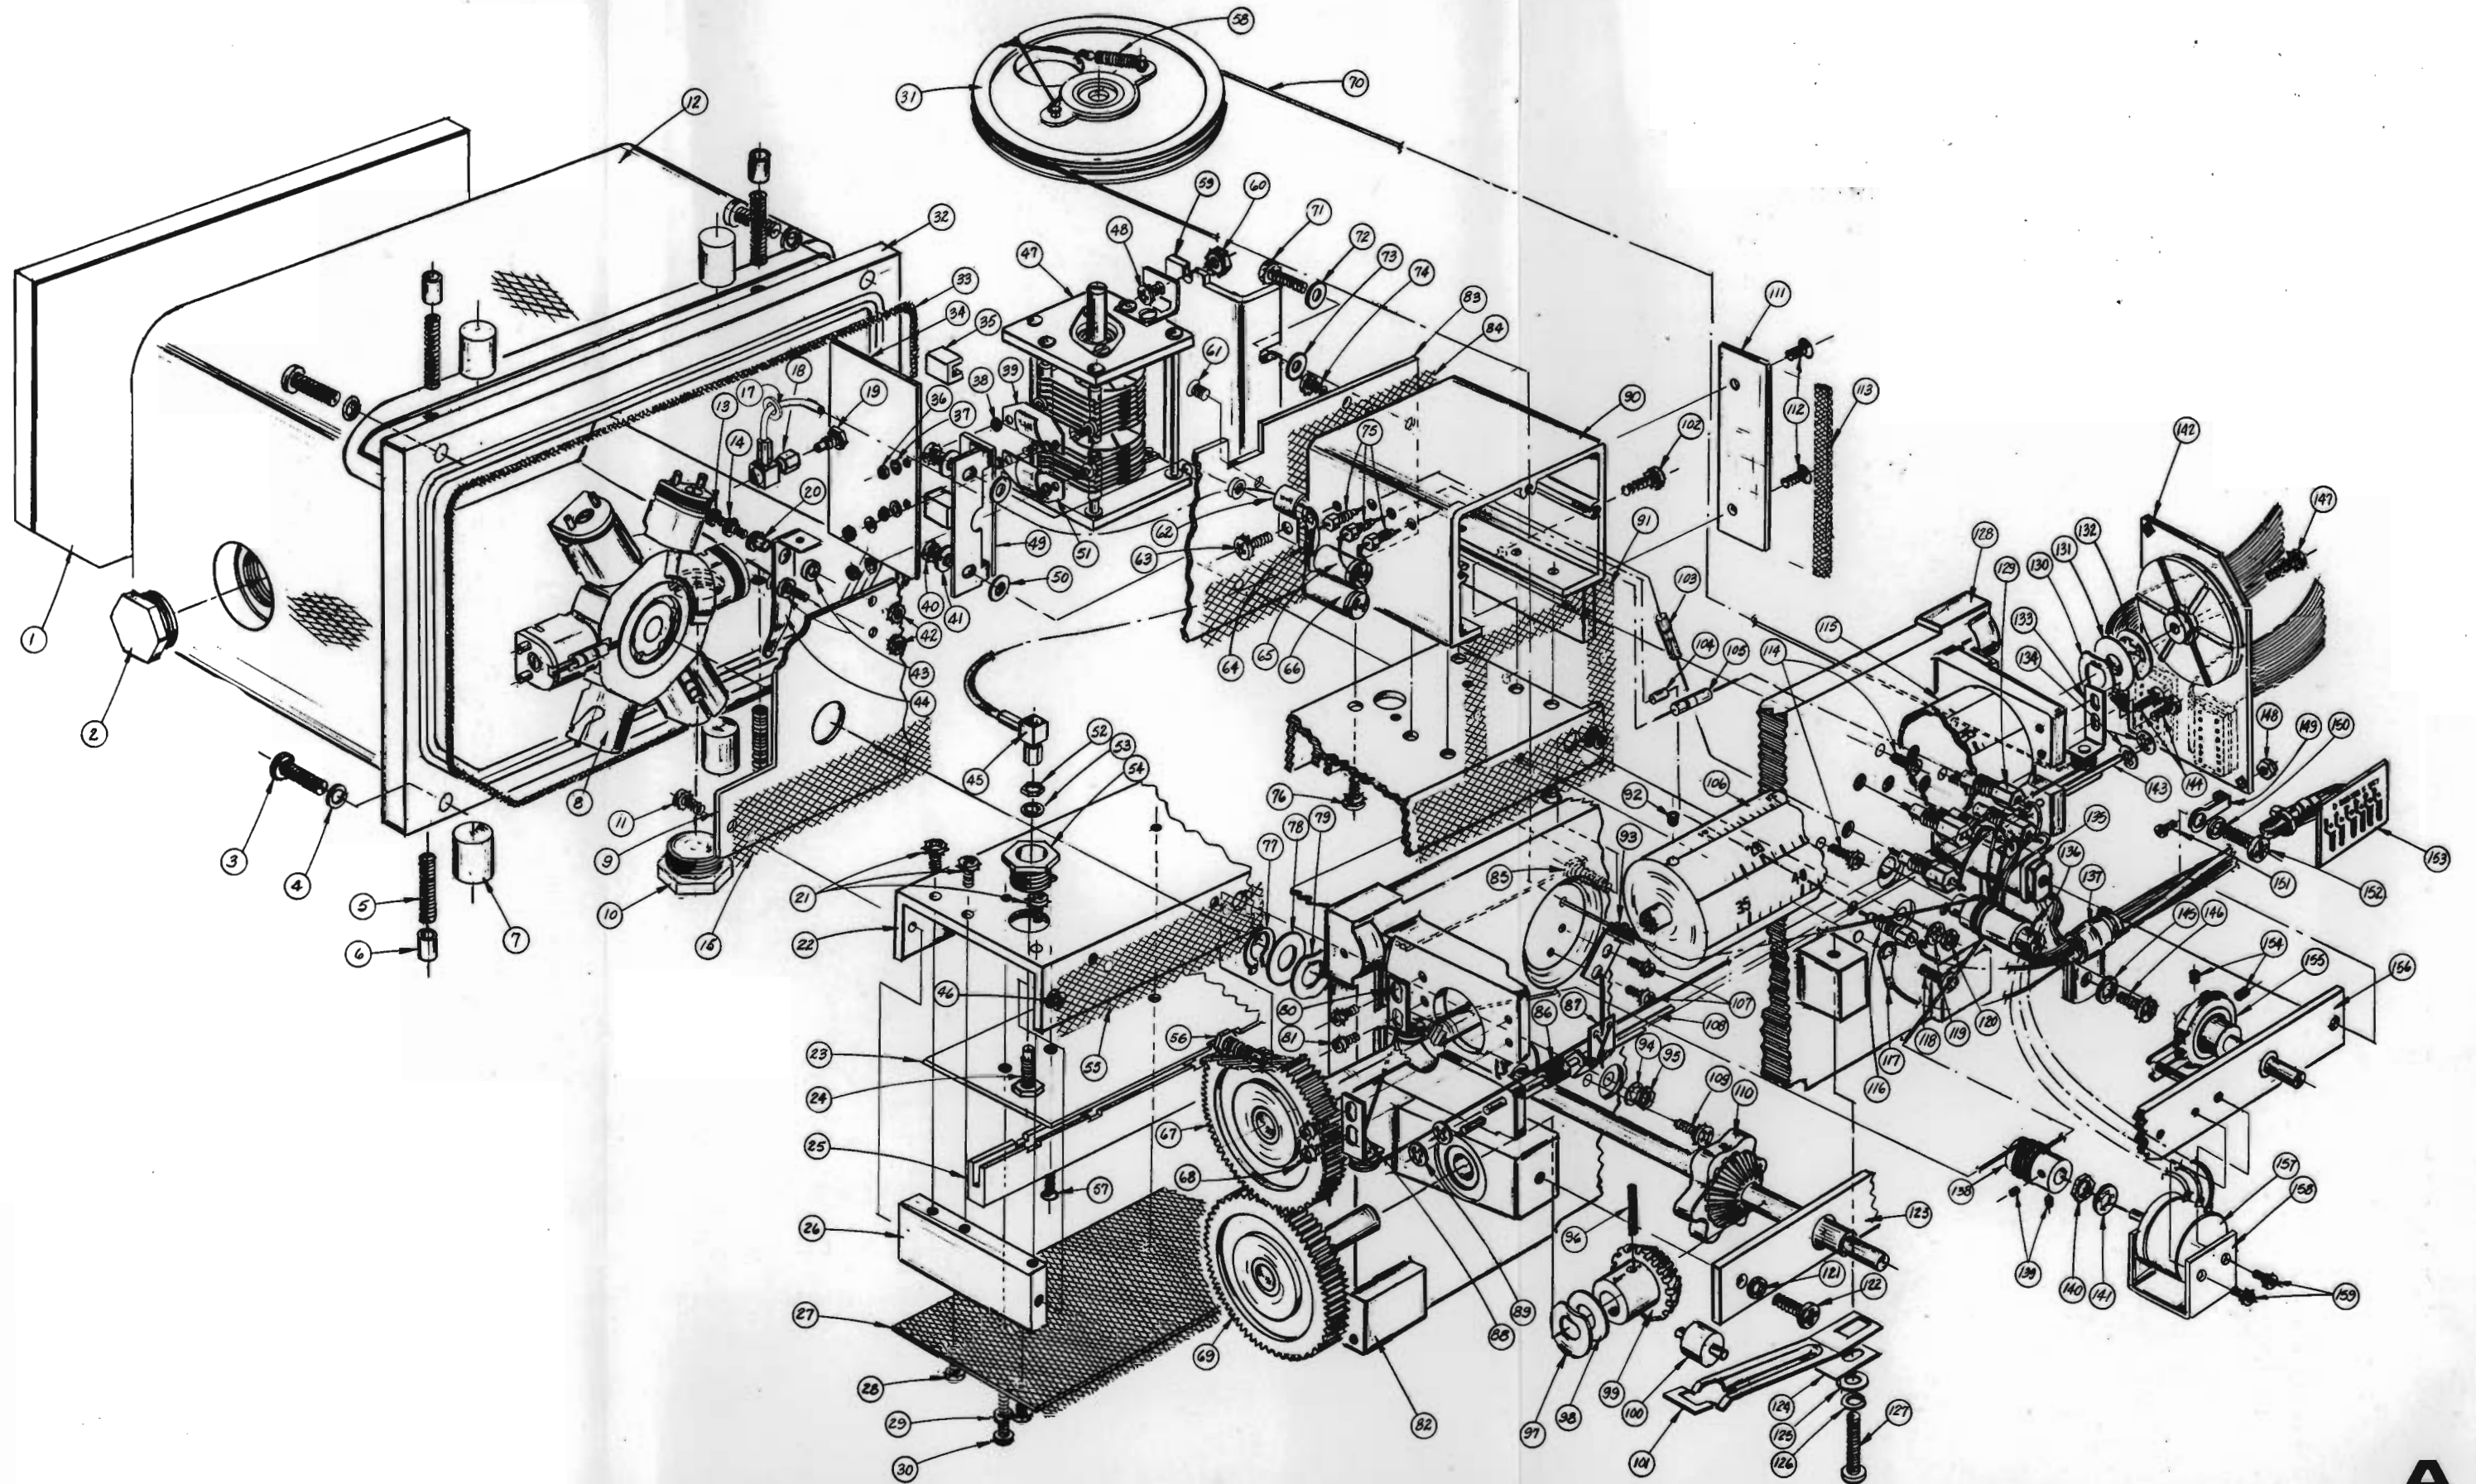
RF Section Assembly Illustrated Parts Breakdown
